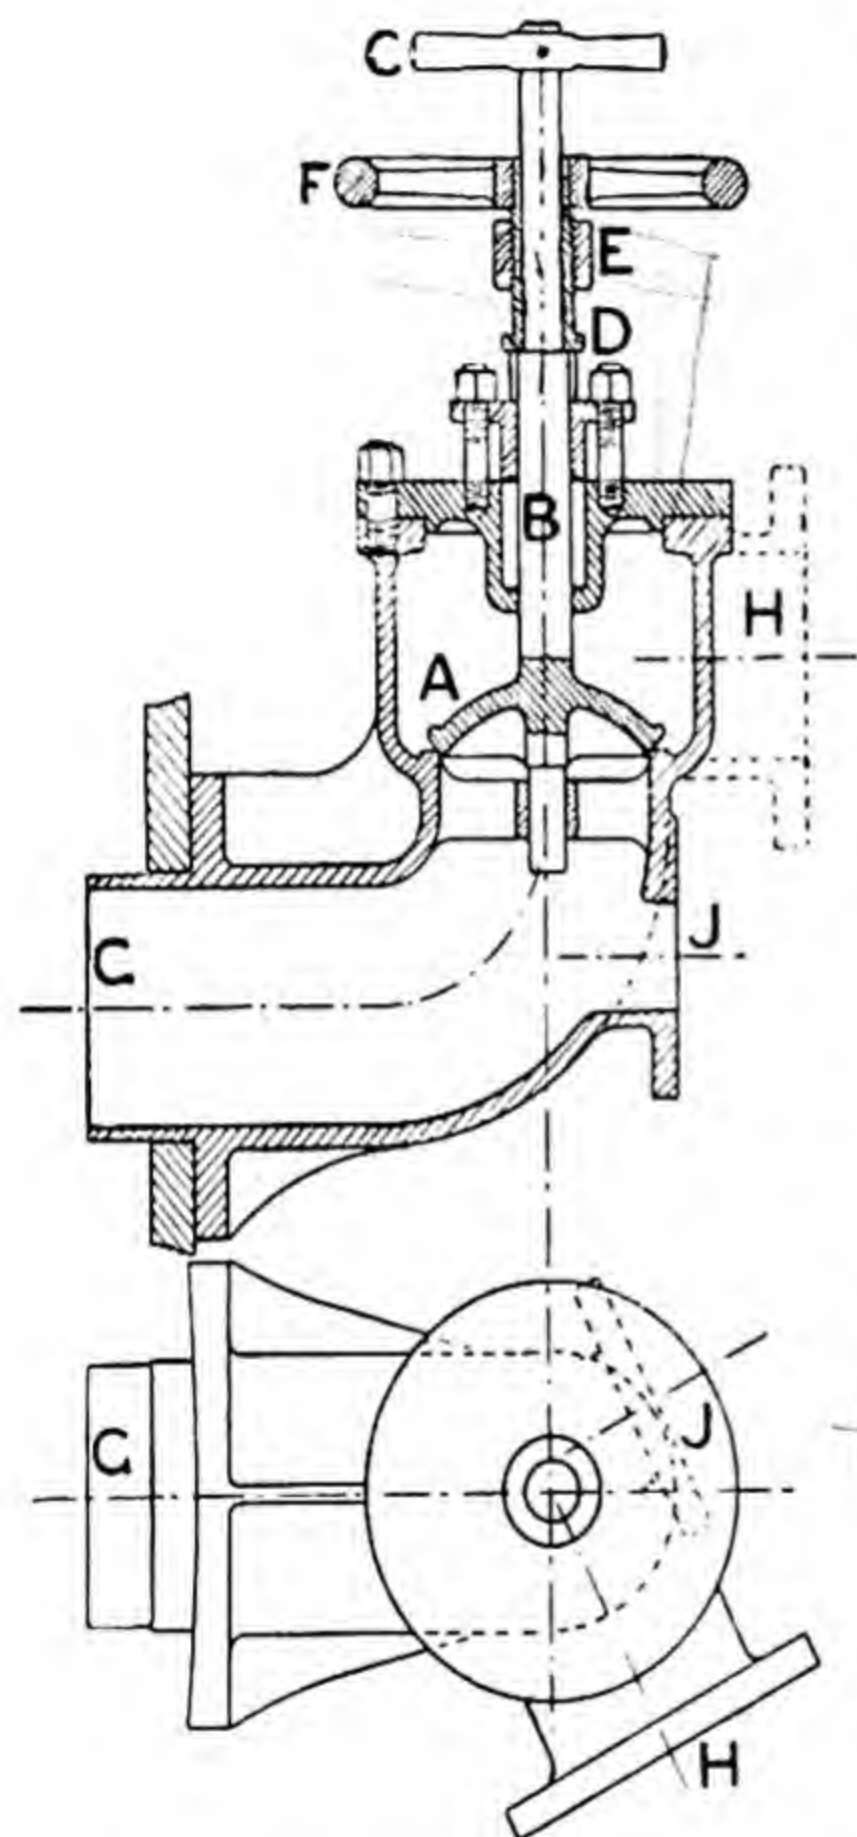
Sectional elevation and plan of a marine automatic stop valve.
